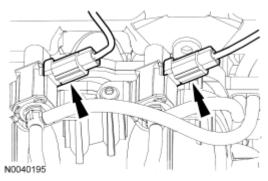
Locating Swirl Control Valve Electrical Connectors Courtesy of FORD MOTOR CO.
